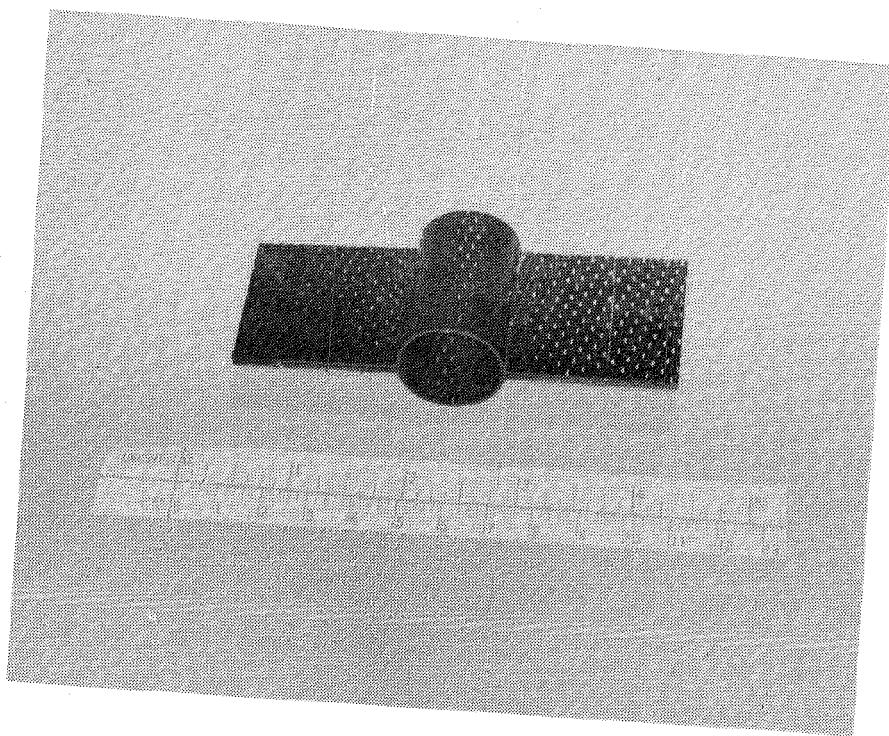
Two "Tee" Connector Web Blanks After First Cuts
